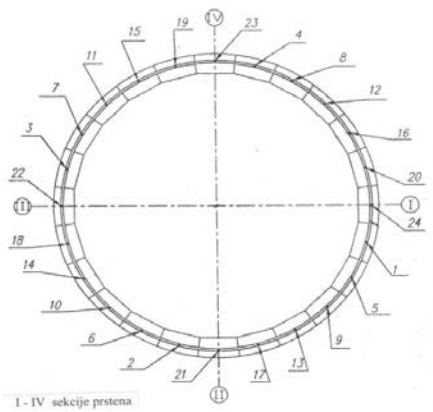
Welding layout of vertical joints in tank shell segments
